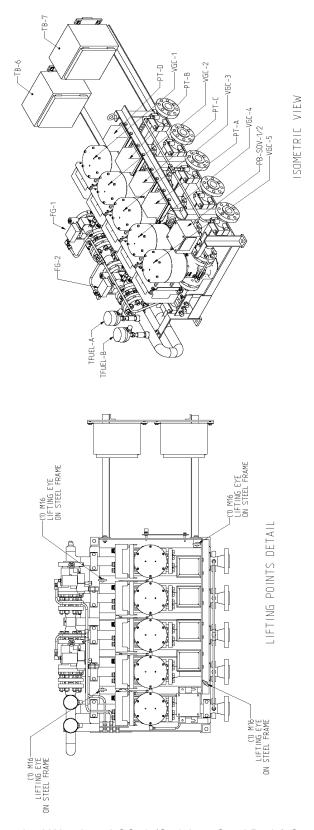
Standard Woodward GS50 (Stainless Steel Body) Gas Fuel Skid Isometric View
